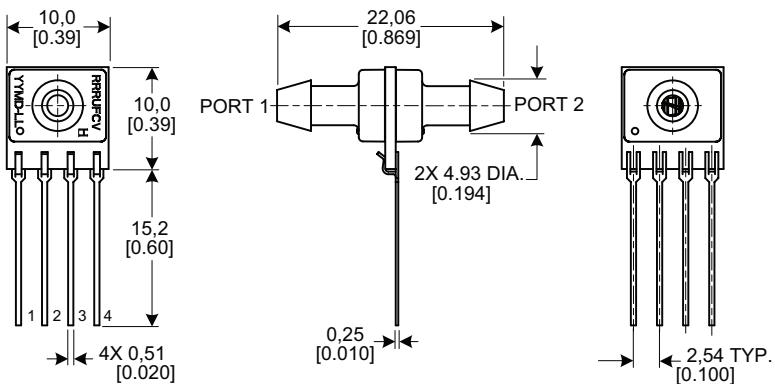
SIP Package Dimensional Drawings (for reference only: mm [in])
